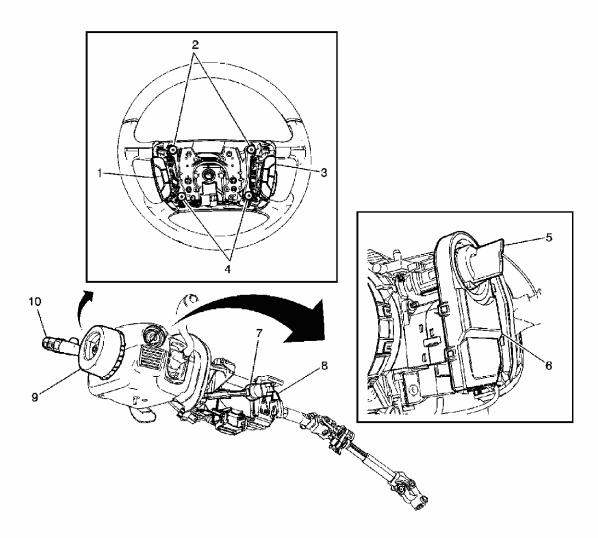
Identifying Steering Column Components Courtesy of GENERAL MOTORS CORP.
